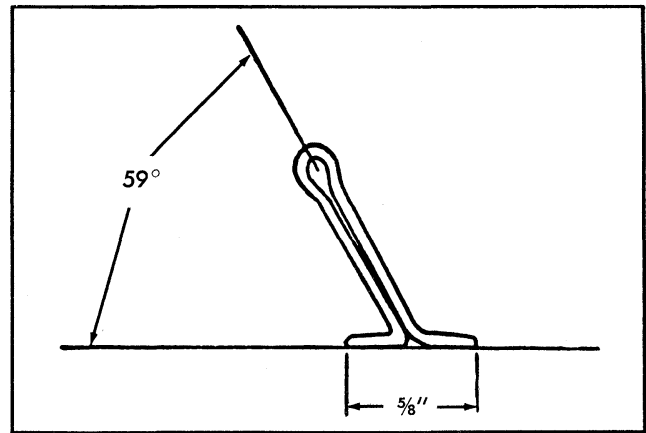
Tool for Removing Upper Half of Main Bearing
